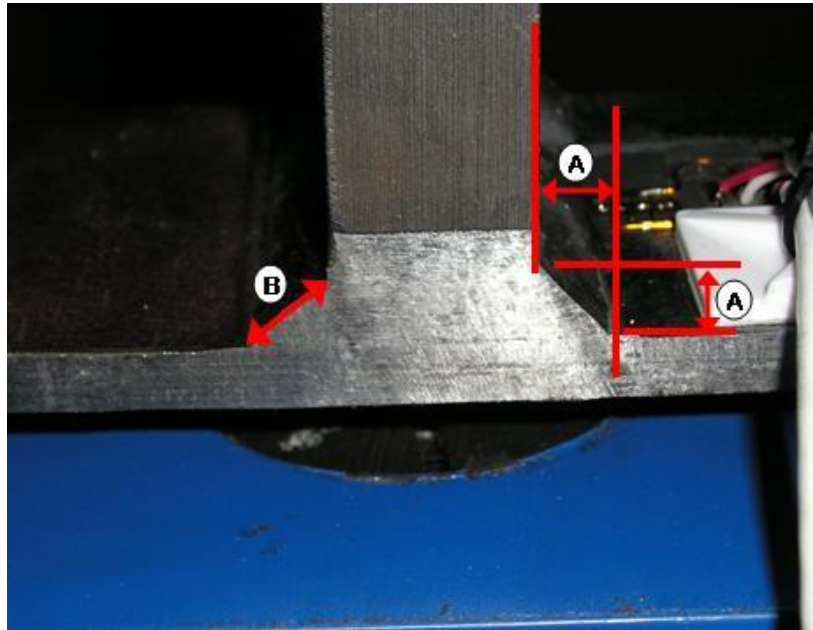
Fully Welded T-Samples (x3)
